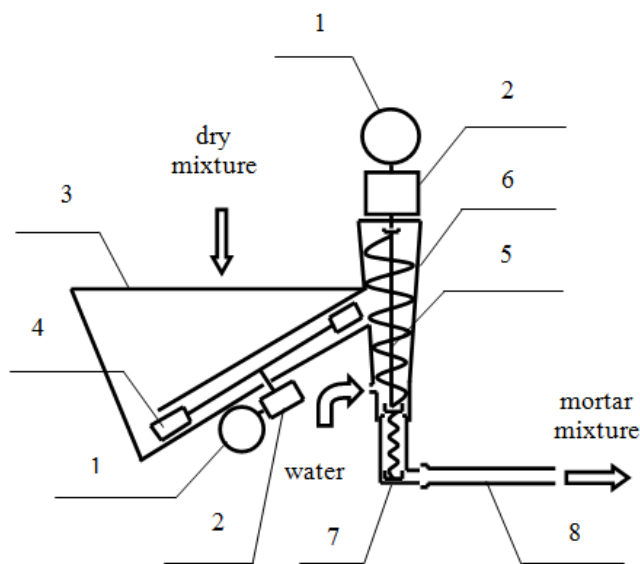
Kinematic scheme of a mortar mixing pump with separate drives for feeding dry mixture, mixer and screw pump equipped with a blade feeder. 1 - electric motor; 2 - reduction gear; 3 - dry mixture receiving hopper; 4 - screw or blade feeder; 5 - mixing screw; 6 - mixing pipe; 7 - screw pump assembly; 8 - mortar pipe.
